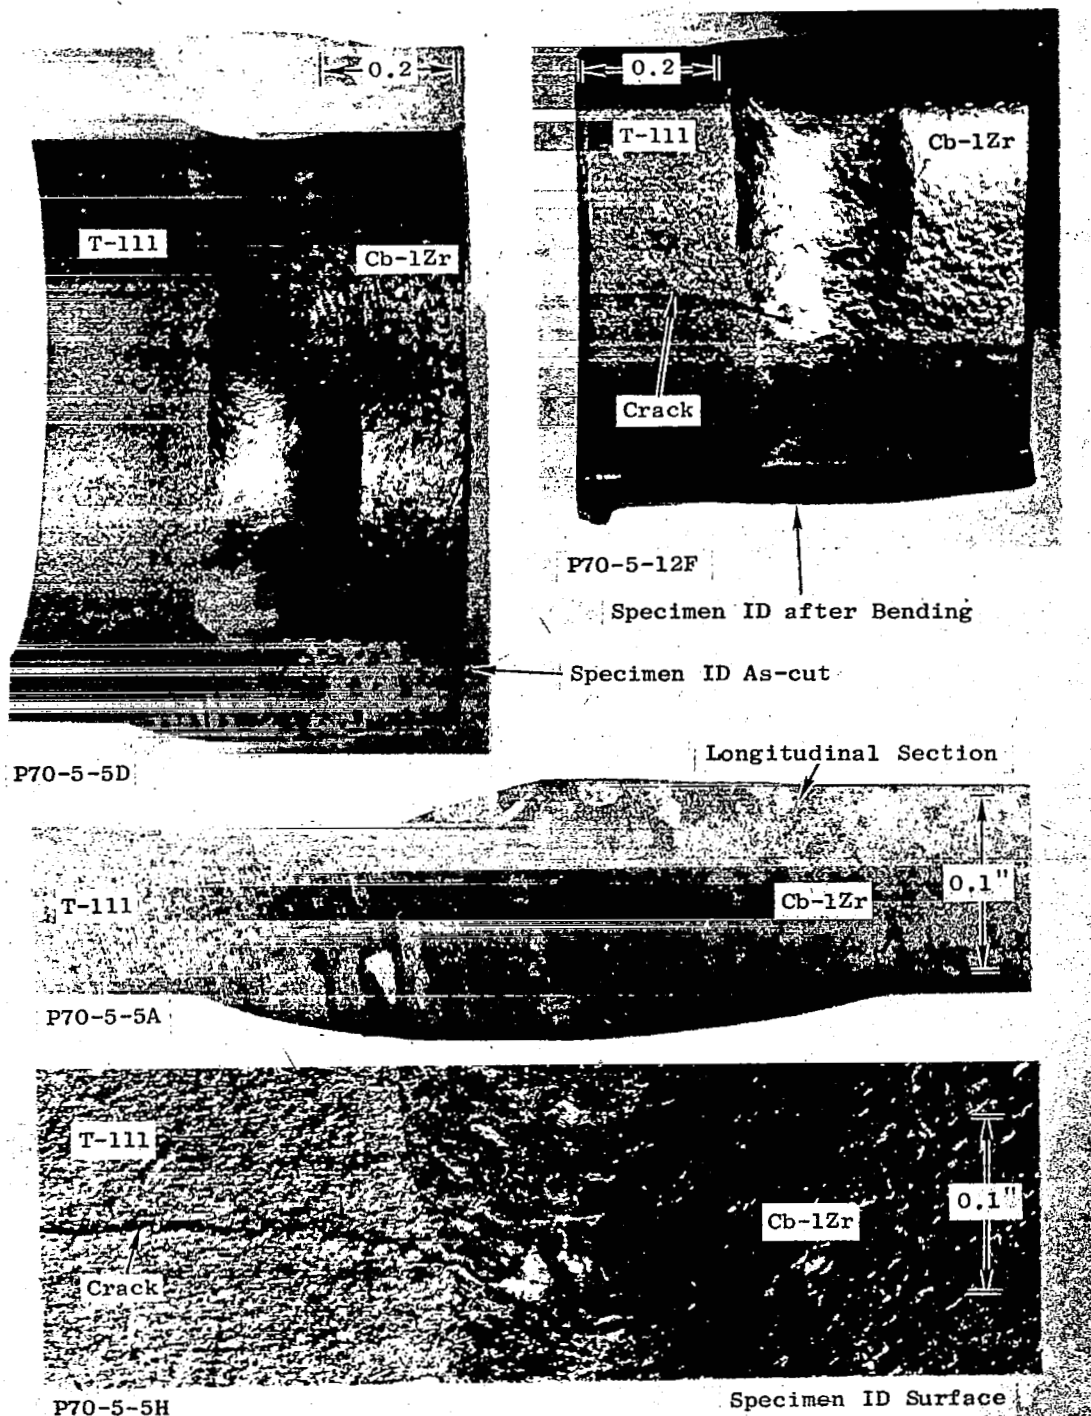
T-111/Cb-1Zr Transition Weld Showing a Crack in the T-111 as a Result of Flattening After 5000 Hours of Testing in the High Temperature Alkali Metal Valve Loop. (Specimen A - Figure 1)
